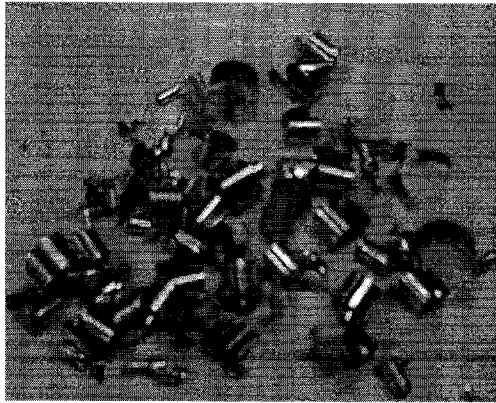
The chip produced during the machining test of the roughing method of the IBR part with the cup mill cutter
